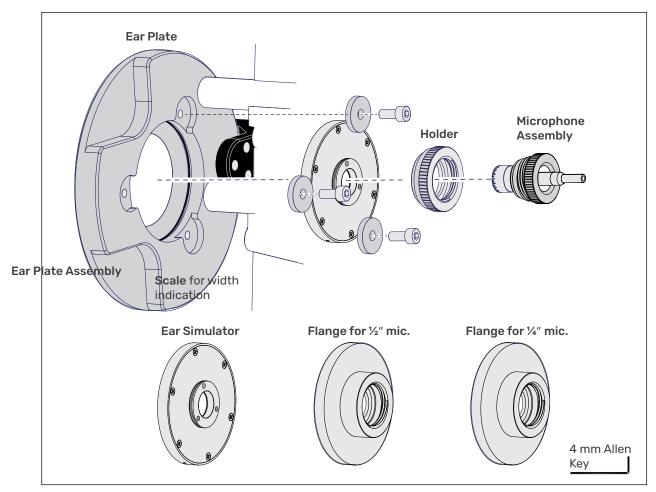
Detailed view of the fittings for ear simulator mounting. The mounting of the ½" and ¾" Microphone Flanges is similar, except that the Holder in the middle is an integral part of the two flanges.
